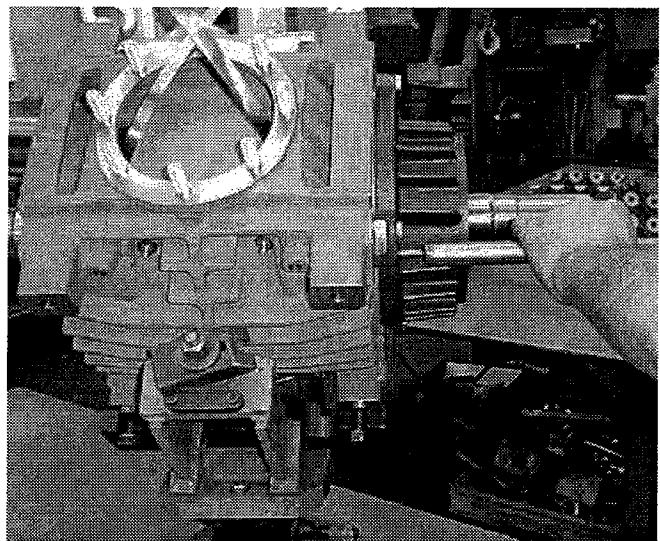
Drive of the cylinder- and conical pins (see chap. 3.1)
